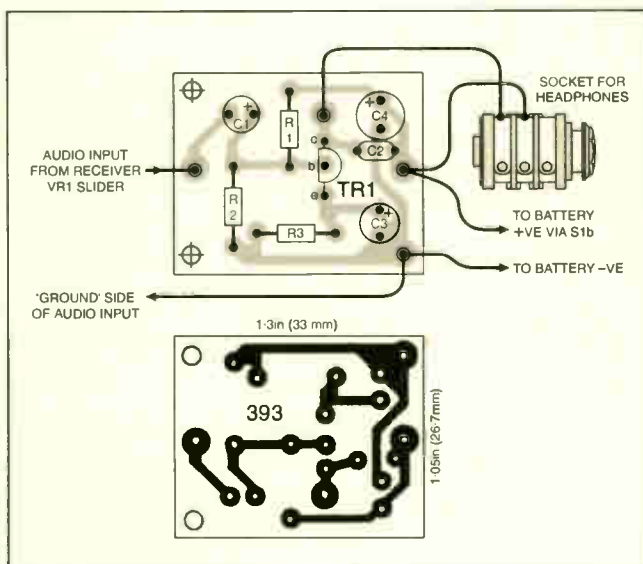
Headphone Amplifier printed circuit board component layout, wiring details and full-size copper foil master.
